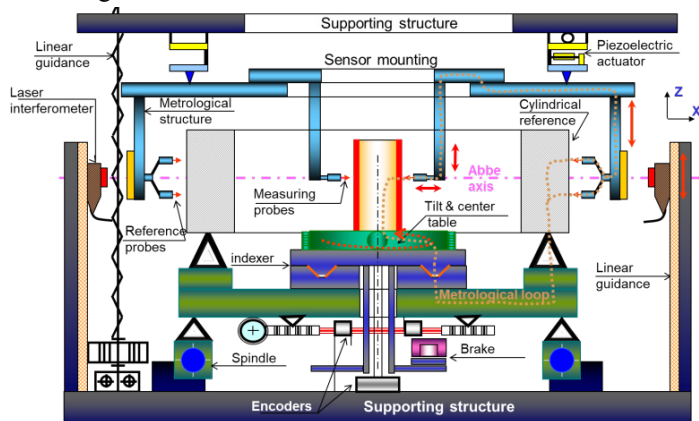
Reduced architecture of the new ultra-high measuring machine developed by the LNE for cylindrical forms measurement [5, 38].
